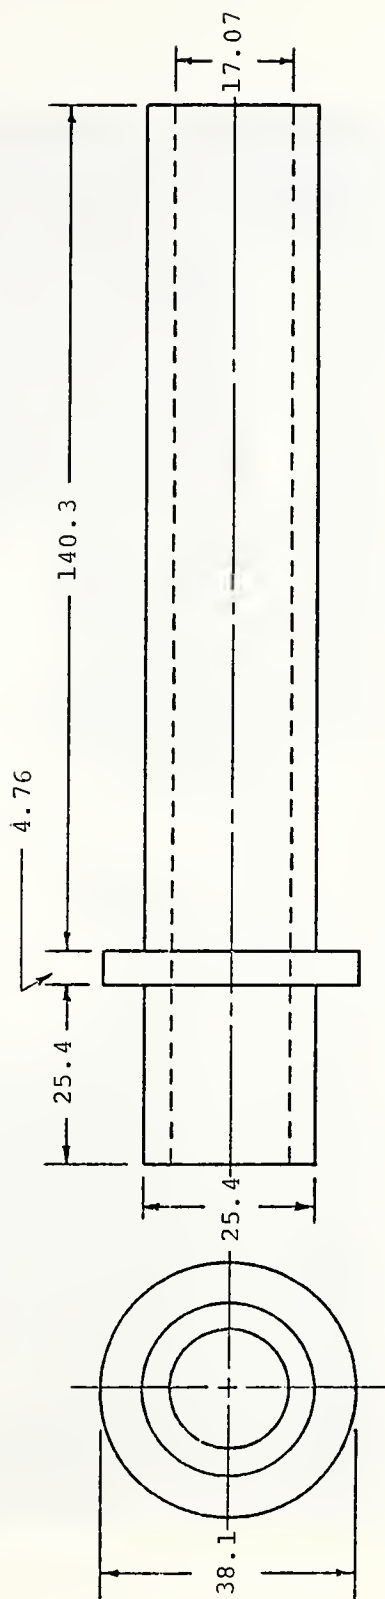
Details of Cooling Water Inlet and Outlet Tubes
